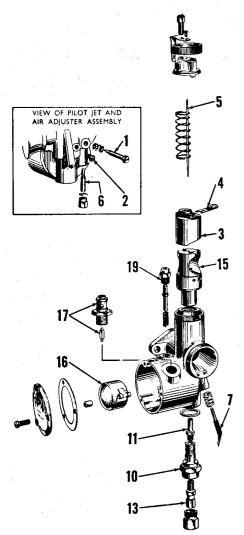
Exploded view of typical Amai Monobloc carburetor.
